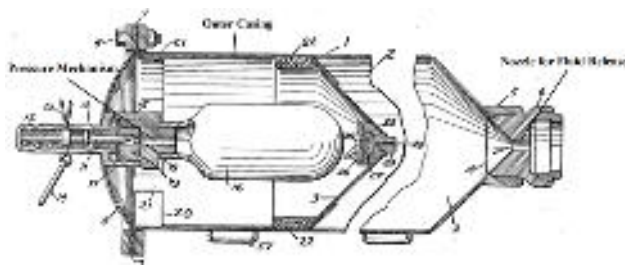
Main Parts of the Fluid Projector: The Pressure Mechanism, Outer Casing and Nozzle. Adapted from Hayner and Loew (1949)
